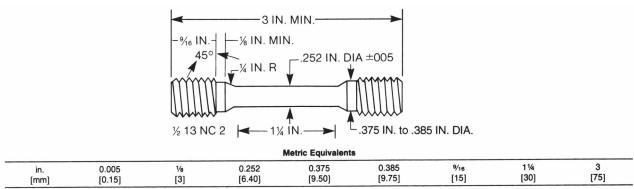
TEST COUPONS FOR CASTINGS (SEE TABLE 2 FOR DETAILS OF DESIGN)
